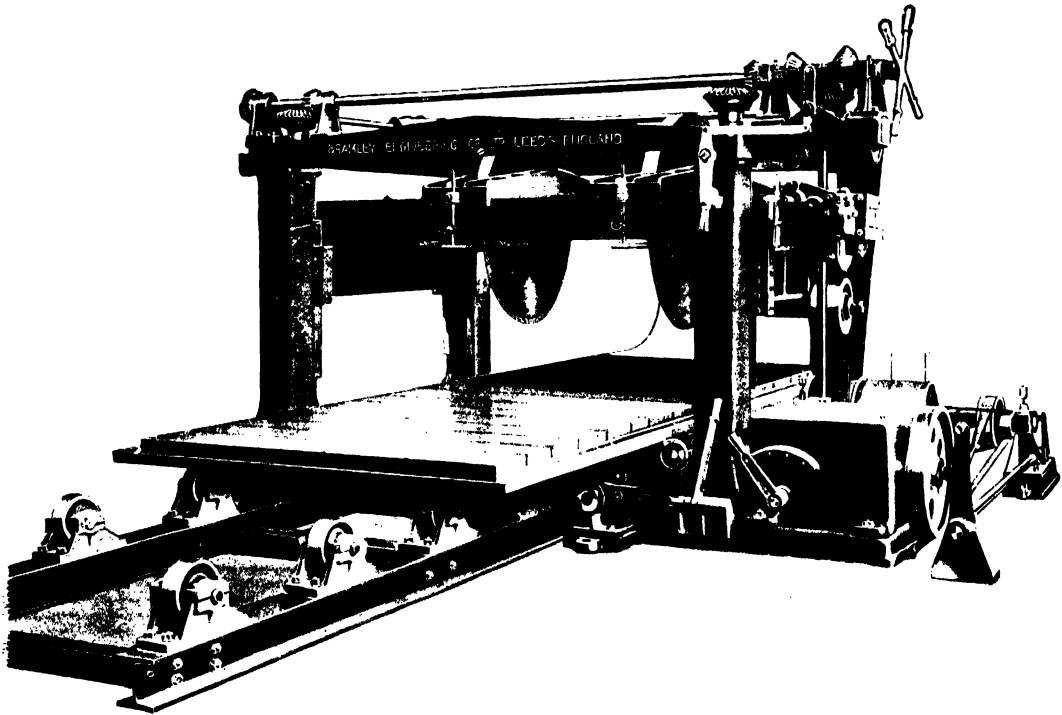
THE "BRAMLEY" TWIN-BLADE DIAMOND SAW
